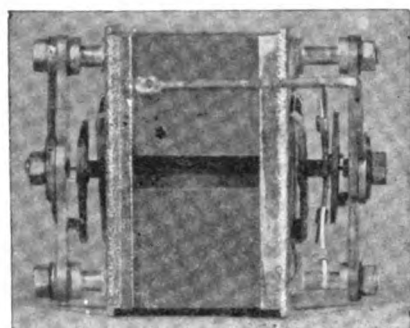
End view of pole piece core assembly with springs and moving elements showing bearings and pivots.
